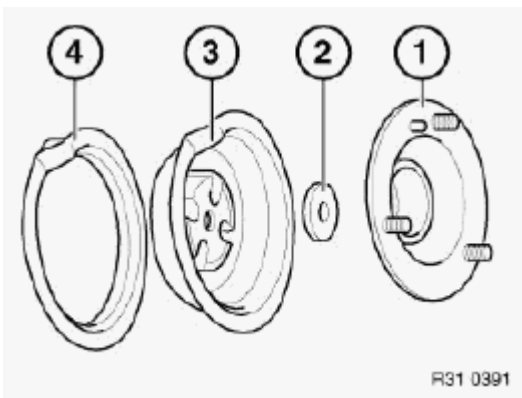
Spring Plate, Support Bearing And Dust Sleeve And Shim
